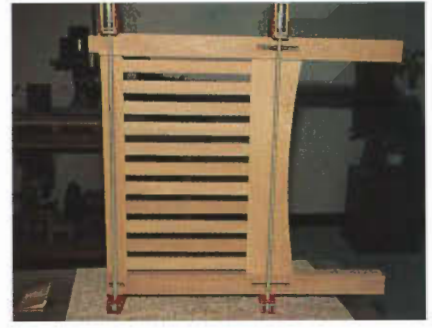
When attaching the legs to the side assembly, the best grain should face outward.
